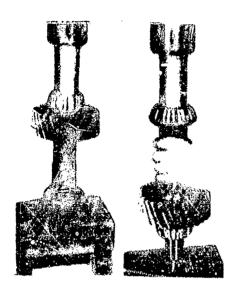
Pressing the bearings onto the middle axle output shaft a) rear bearing b) front bearing
